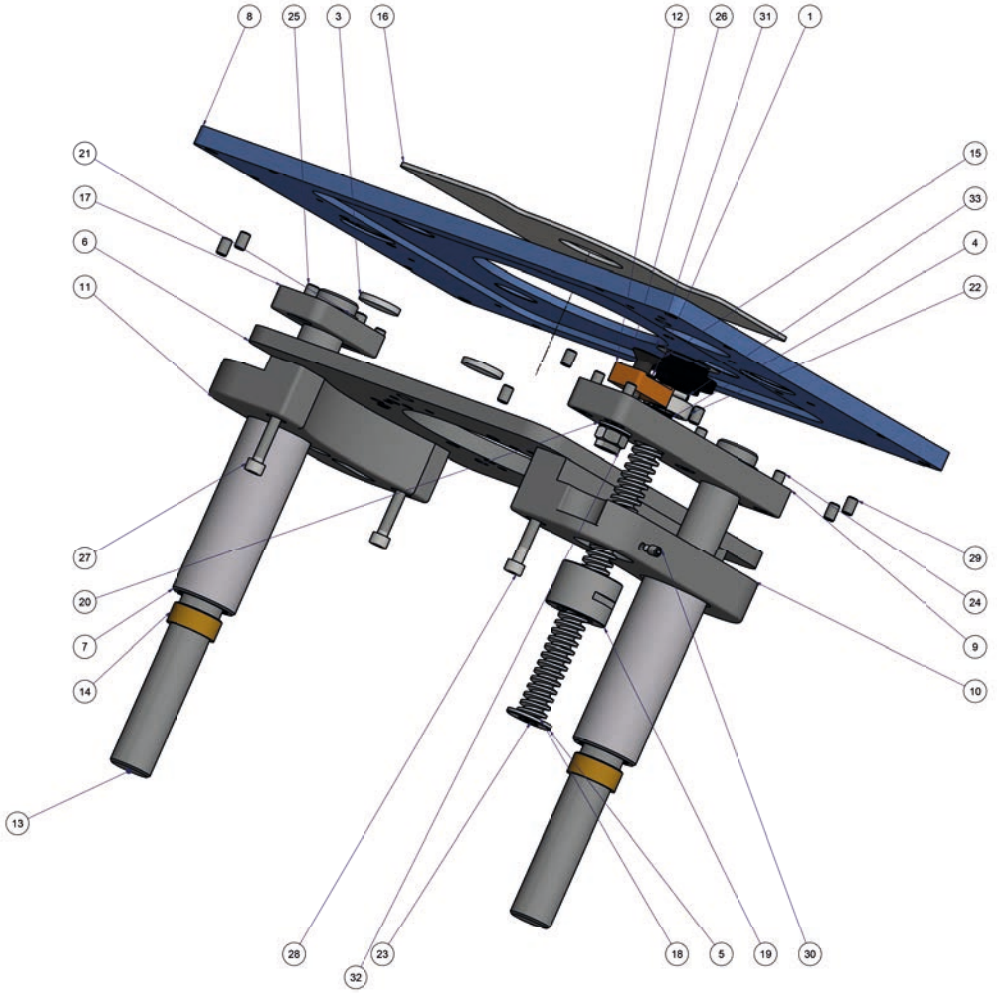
Exploded view of OFL2.0 and OFL2.0-MINI
